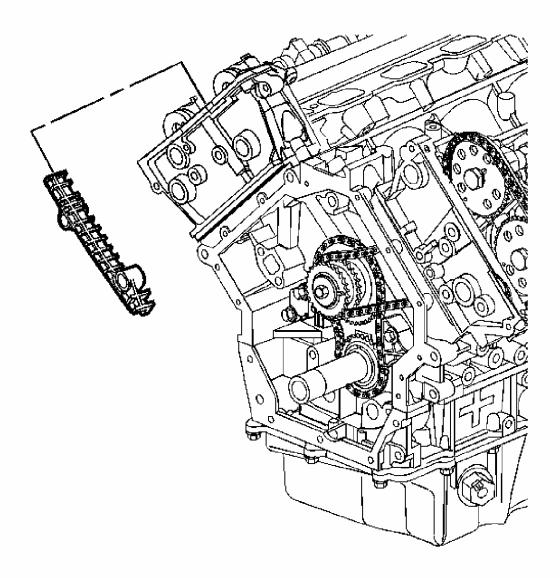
View of Right Secondary Camshaft Drive Chain Guide Courtesy of GENERAL MOTORS CORP.
